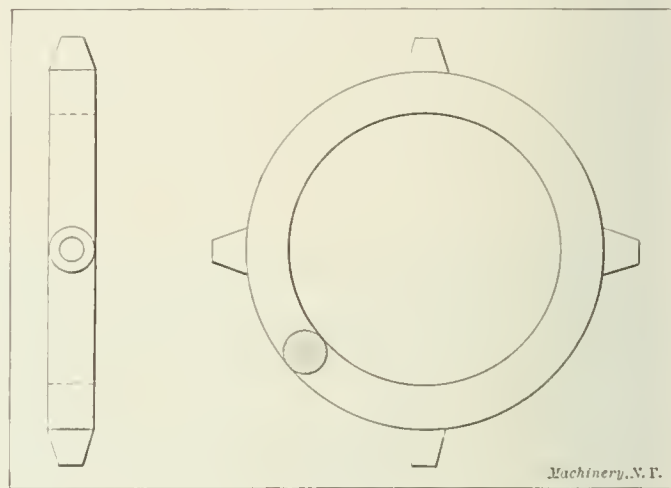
A Forging for which the Die Impression should be milled and typed before turning
